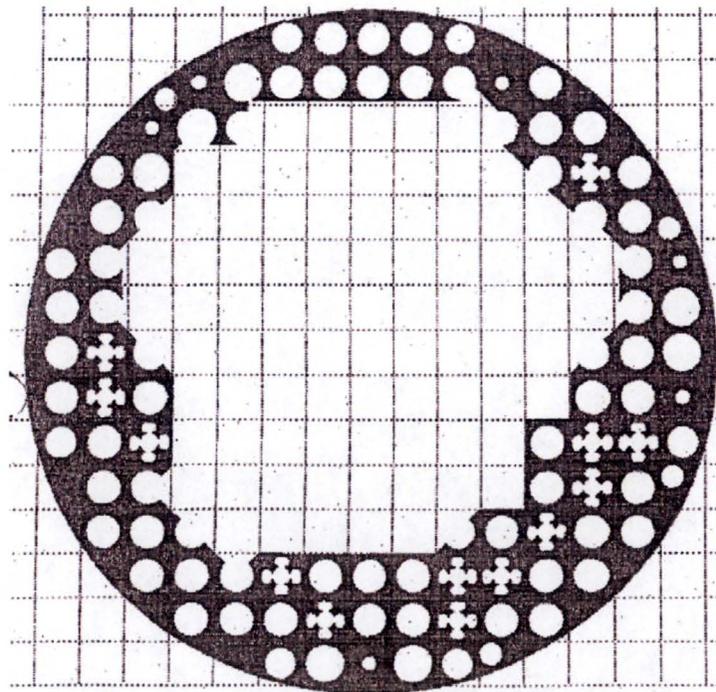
Incore Guide Support Plates After Cuts (Ref. [1], Figure 5-25)
